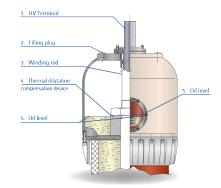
H6 head type (Bottom connection 420 kV 2500 A to 550 kV)
